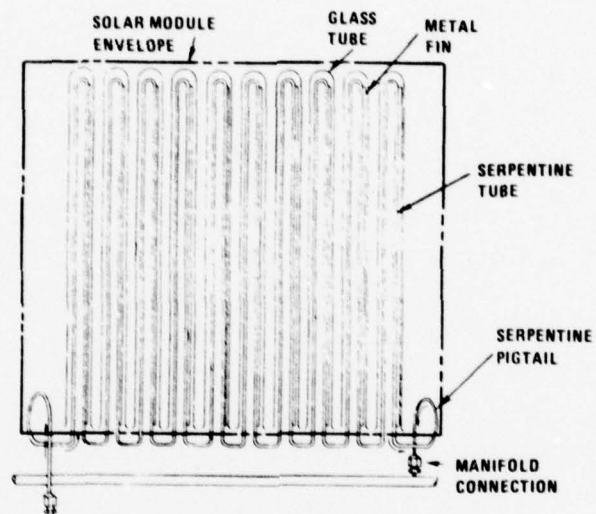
Serpentine Heat Exchanger Assembly [4]
